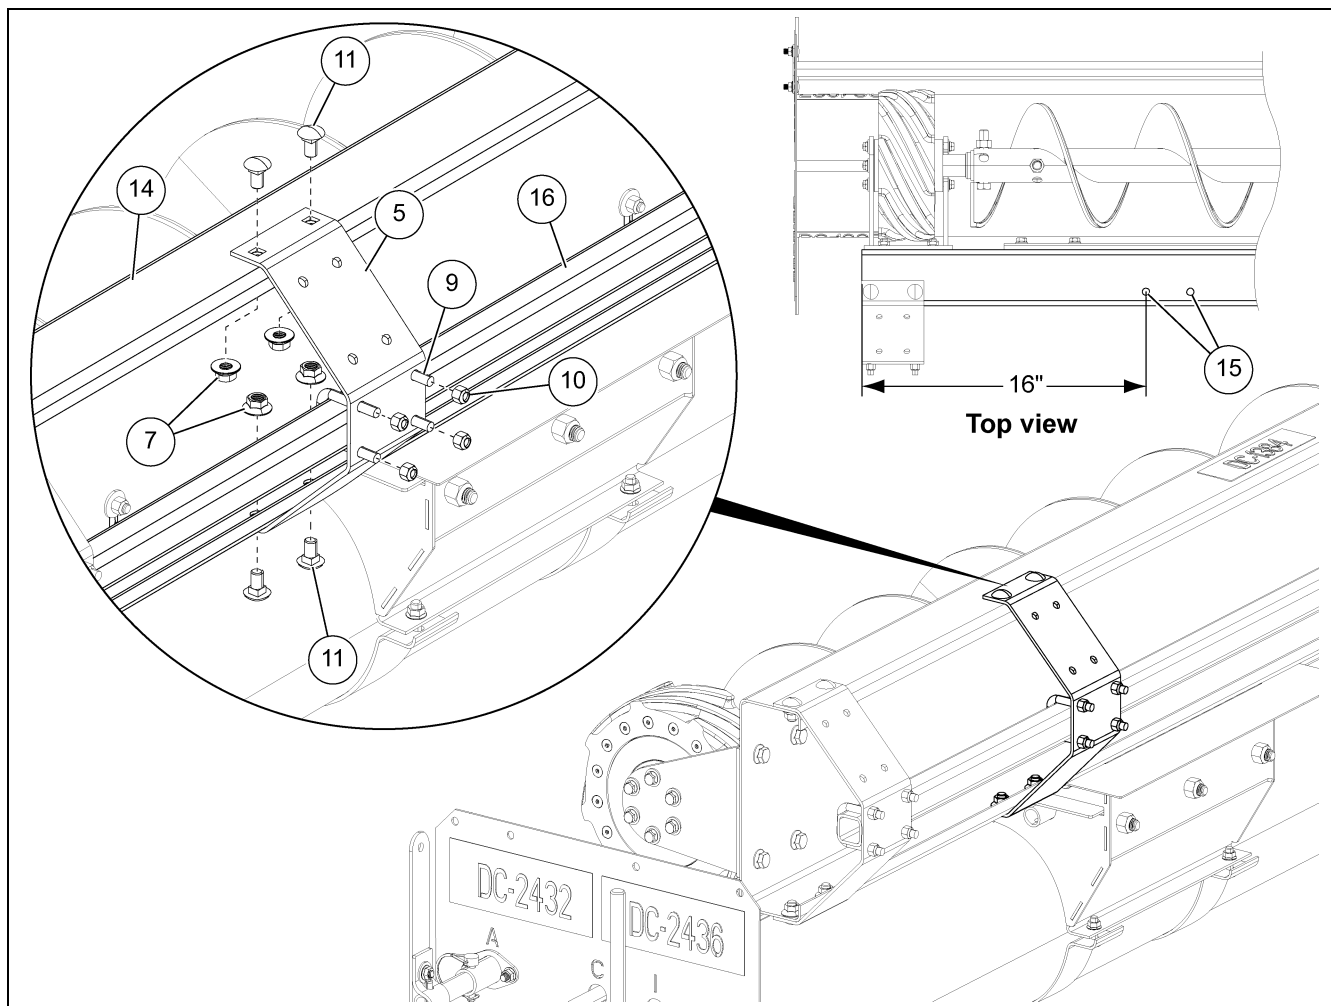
Installing the Torque Tube Bracket to the Backshield for Retrofit
